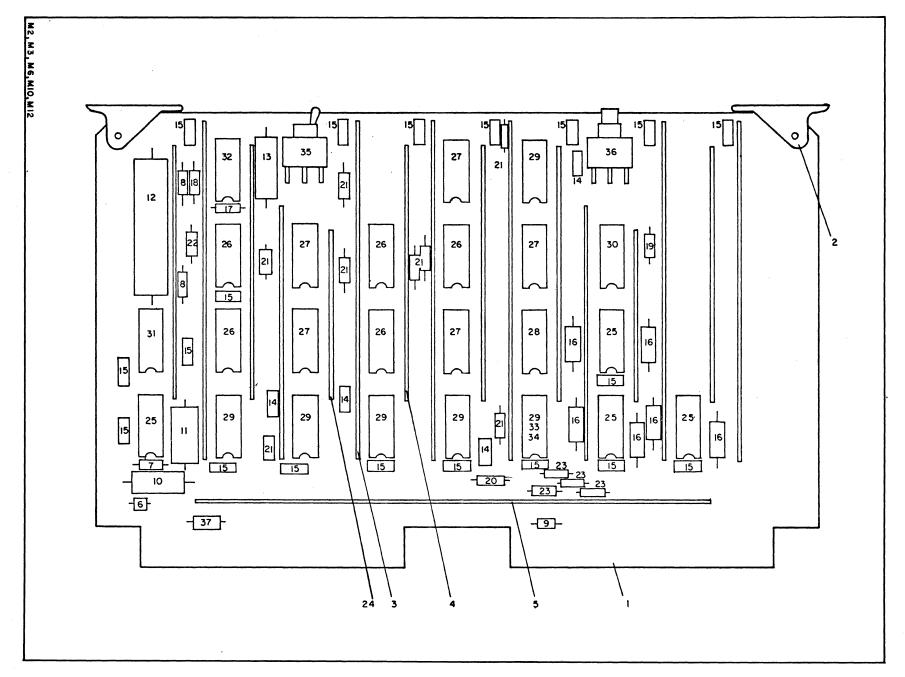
P.C. ASSEMBLY - Error Card
